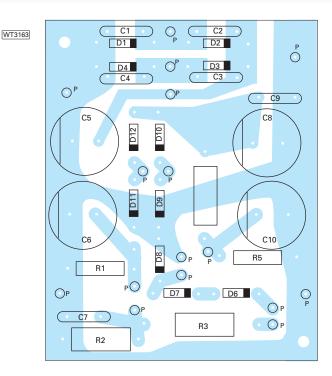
A suitable printed circuit board, showing the track and component overlay.
